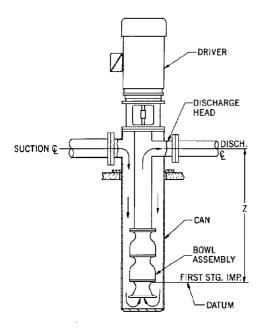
First stage impeller datum closed suction – can pump
